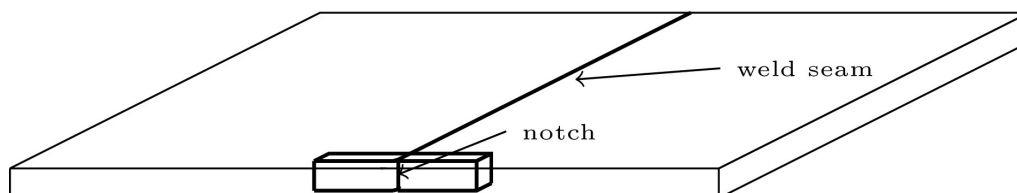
Position of Charpy specimens in the welded sheet.
